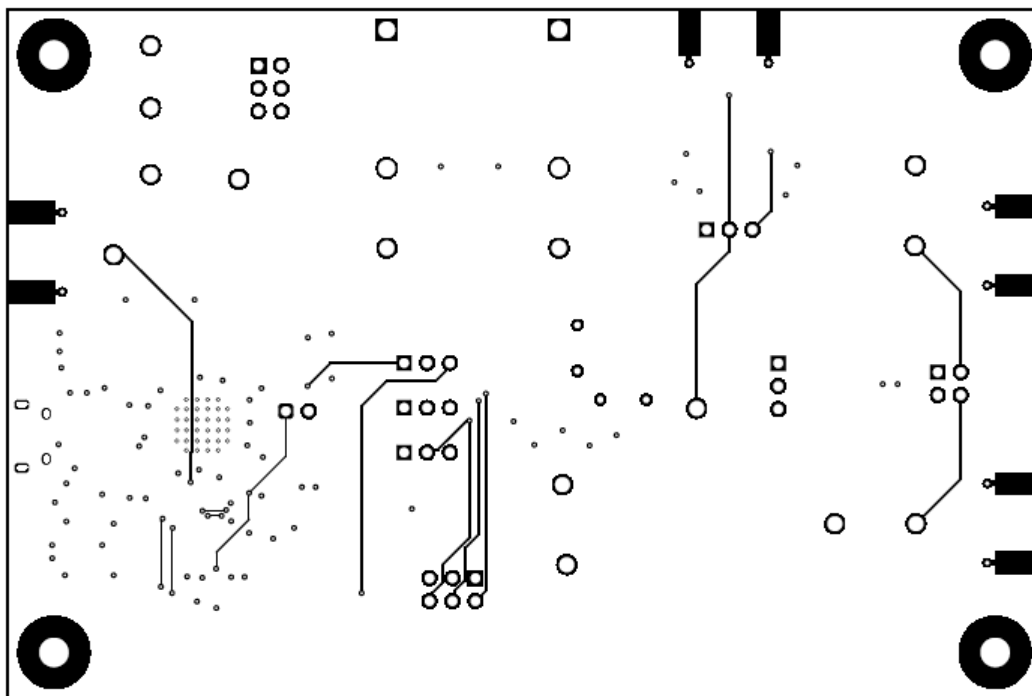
DAC8N-DGK-EVM PCB Bottom Layer Layout
